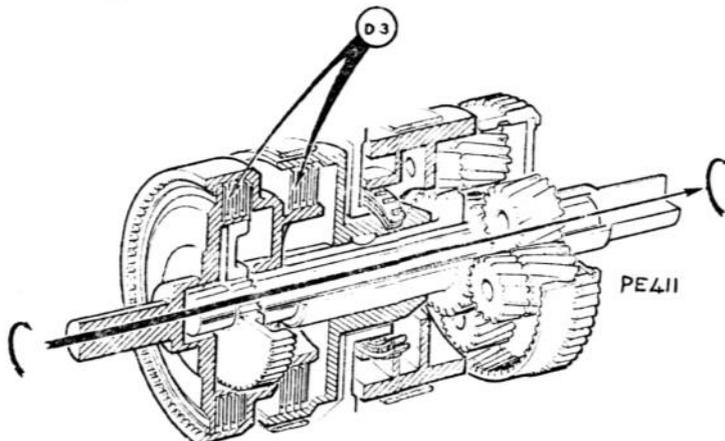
Direct drive: In this condition the drive is taken straight through the gearbox from end to end. With the lever at 'D' automatic downward changes will be made to second gear at the following speeds:
